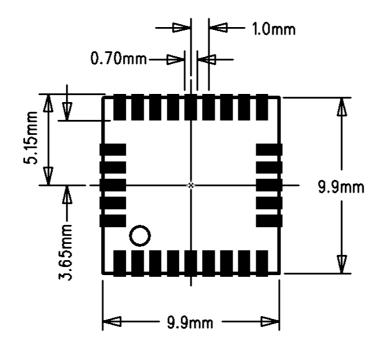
Suggested pad layout and occupied area, top view. Suggested paste mask openings equal pad layout.
